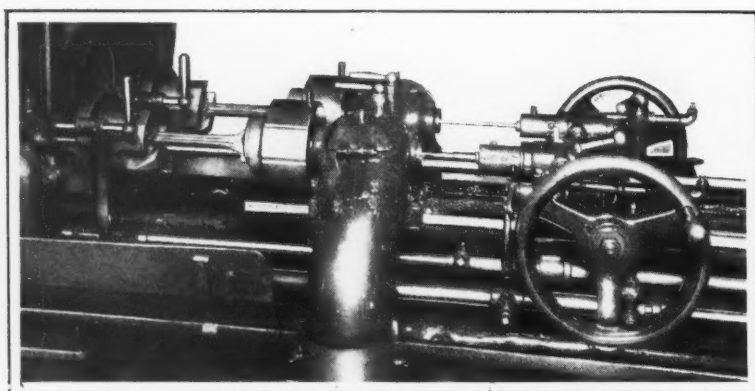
Typical Gun Drilling Machine Used for Drilling a Small-diameter Hole through the Arm of Connecting-rods
